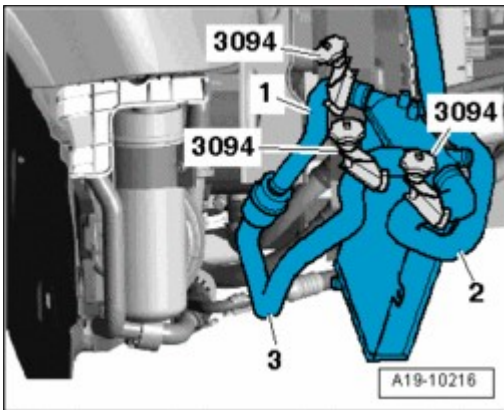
Clamping Off Coolant Hoses With Hose Clamps & Removing From Right Auxiliary Cooler
